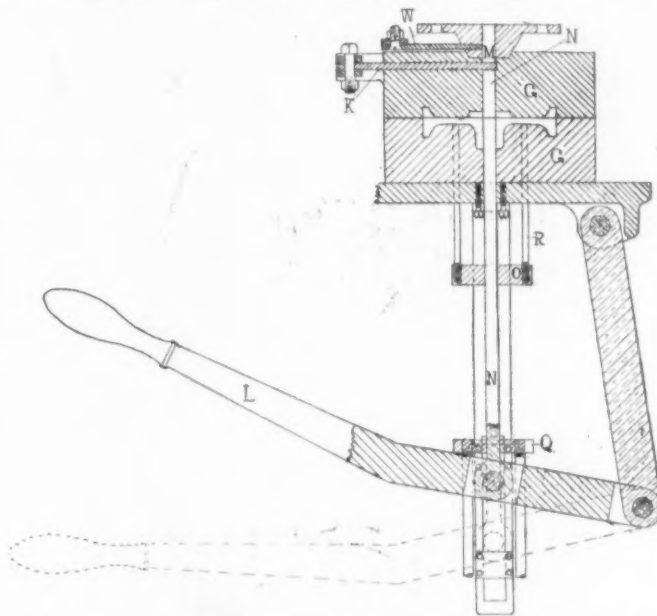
ANOTHER VIEW OF MACHINE, SHOWING SPRUE CUTTER.
